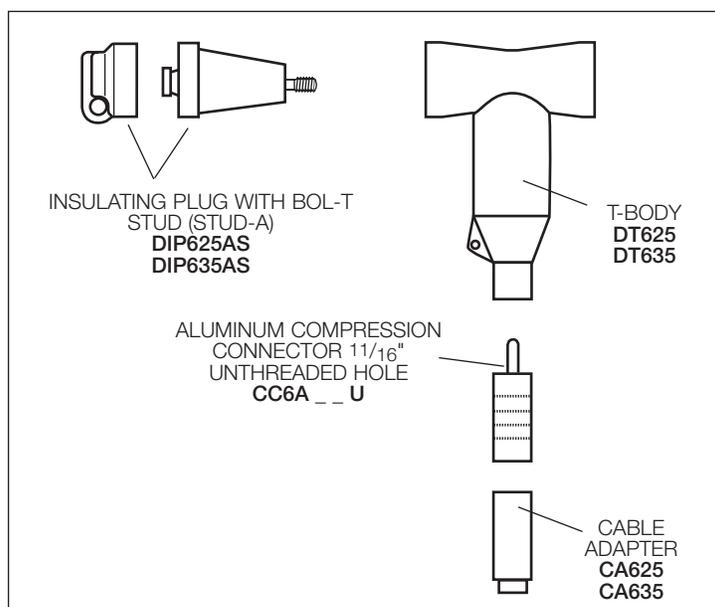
BOL-T connector kit (BT6.5) components. For more details, see catalog sections CA650003EN and CA650008EN.
